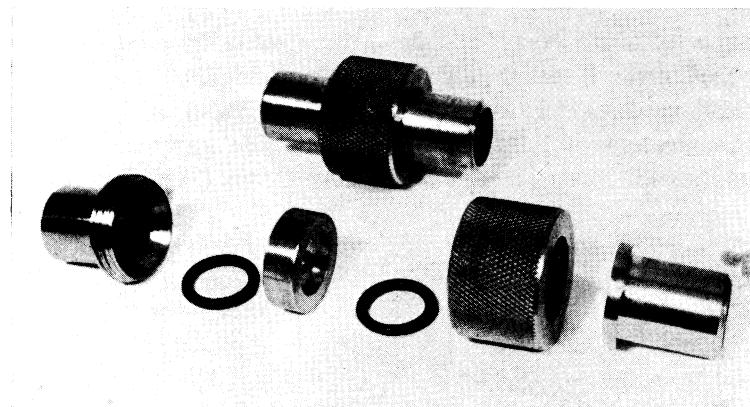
Vacuum union and its component parts (*Courtesy of N.G.N. Electrical⁹²⁶*)
